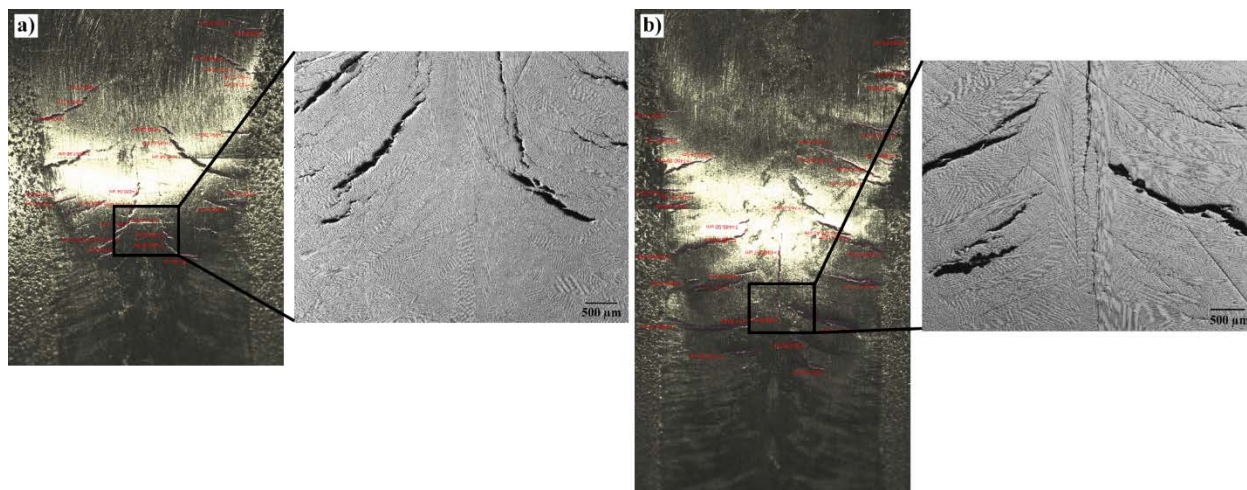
Test plates from the welding parameter of 140_100 a) with the least amount of cracking, b) with the highest amount of cracking.
